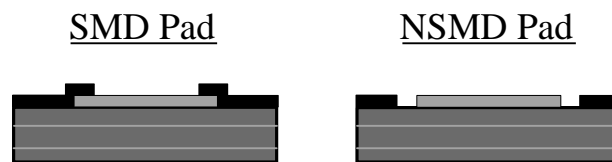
Solder Mask Defined Vs Non Solder Mask Defined
